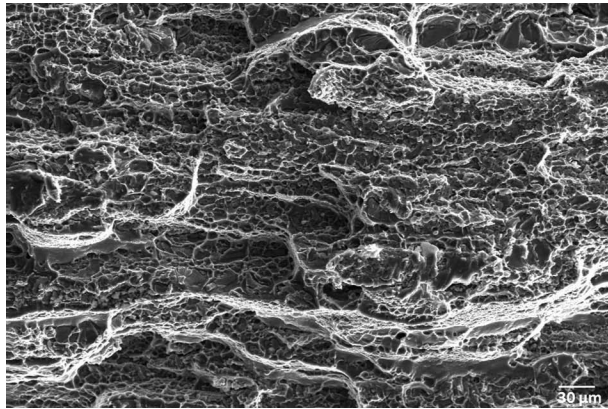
Higher magnified image of the fracture surface shown in Fig. 9. Note the direction of thermomechanical processing is along the length of the photograph. Fine equiaxed dimples are seen throughout the specimen
